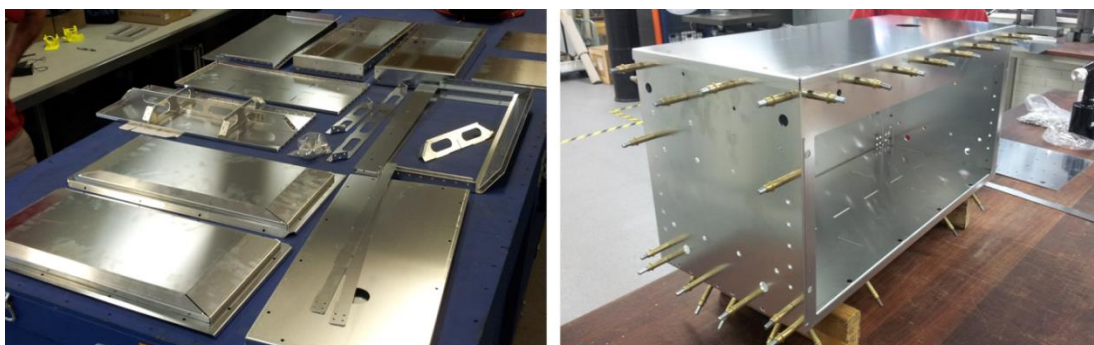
The individual components for the battery boxes prior to assembly and the boxes being assembled using Clecos to positioning the components prior to riveting.
